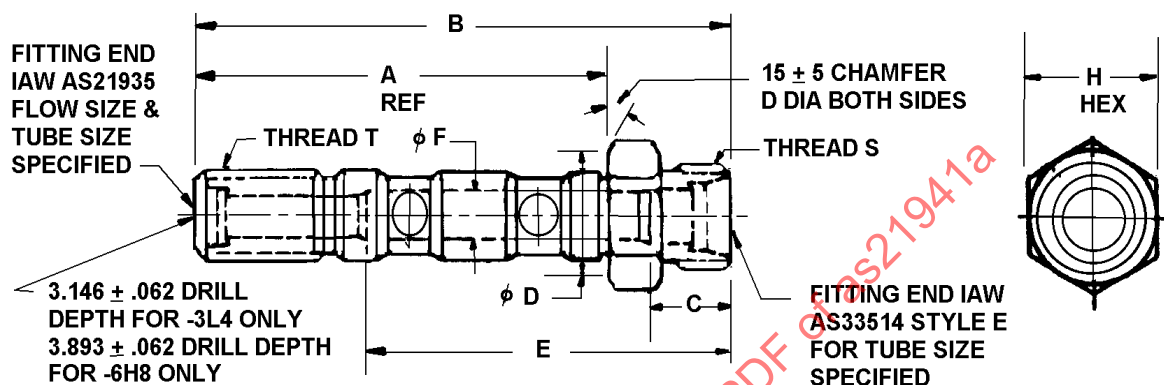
BOLT, CLUSTER FITTING, DOUBLE PORT, THROUGH, FLARELESS, DIMENSIONS AND CONFIGURATION
